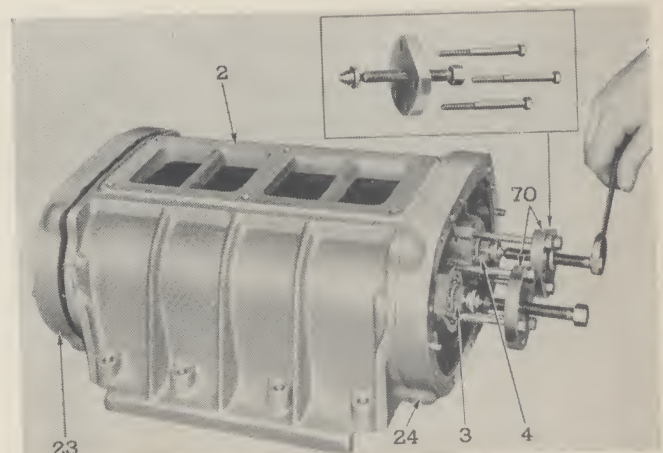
A—Showing method and tools used in removing rotor shafts from rear bearings, and front end plate from housing on a GM blower.
